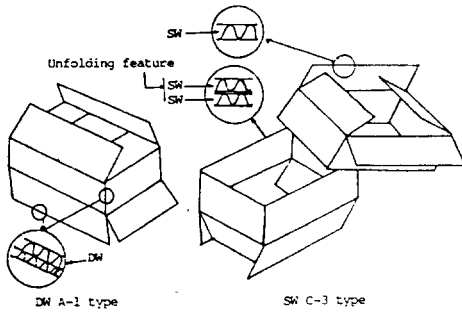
Comparative exterior view of corrugated paperboard box between double wall A-1 type and single wall C-3 type.
